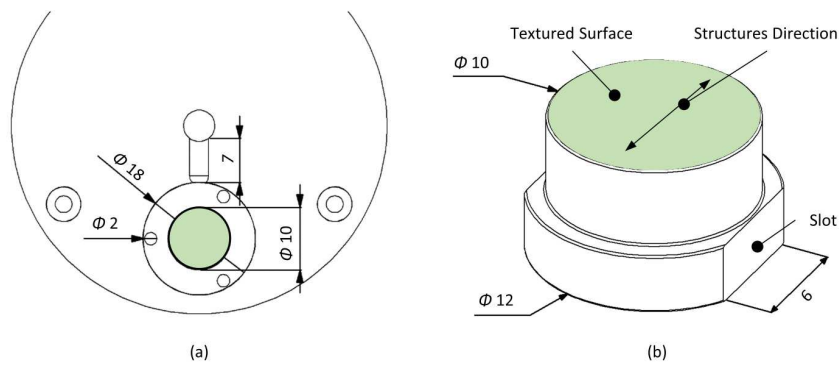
(a) Design of the mold cavity. (b) Design of the textured insert and alignment features. (All dimensions are in millimeters).
